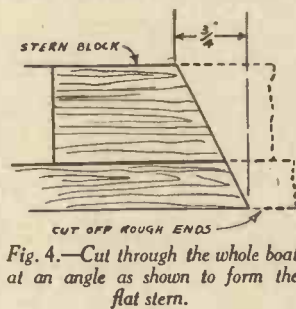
Cut through the whole boat at an angle as shown to form the flat stern.
